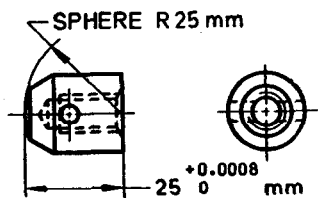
DIMENSIONS FOR SPHERICAL END-PIECE
